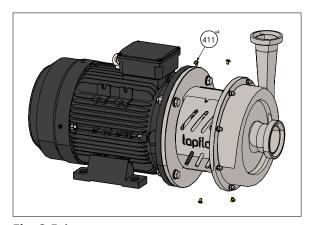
Unscrew the shaft guard screws [411] fastening the shaft guards [41] to the lantern [11].
